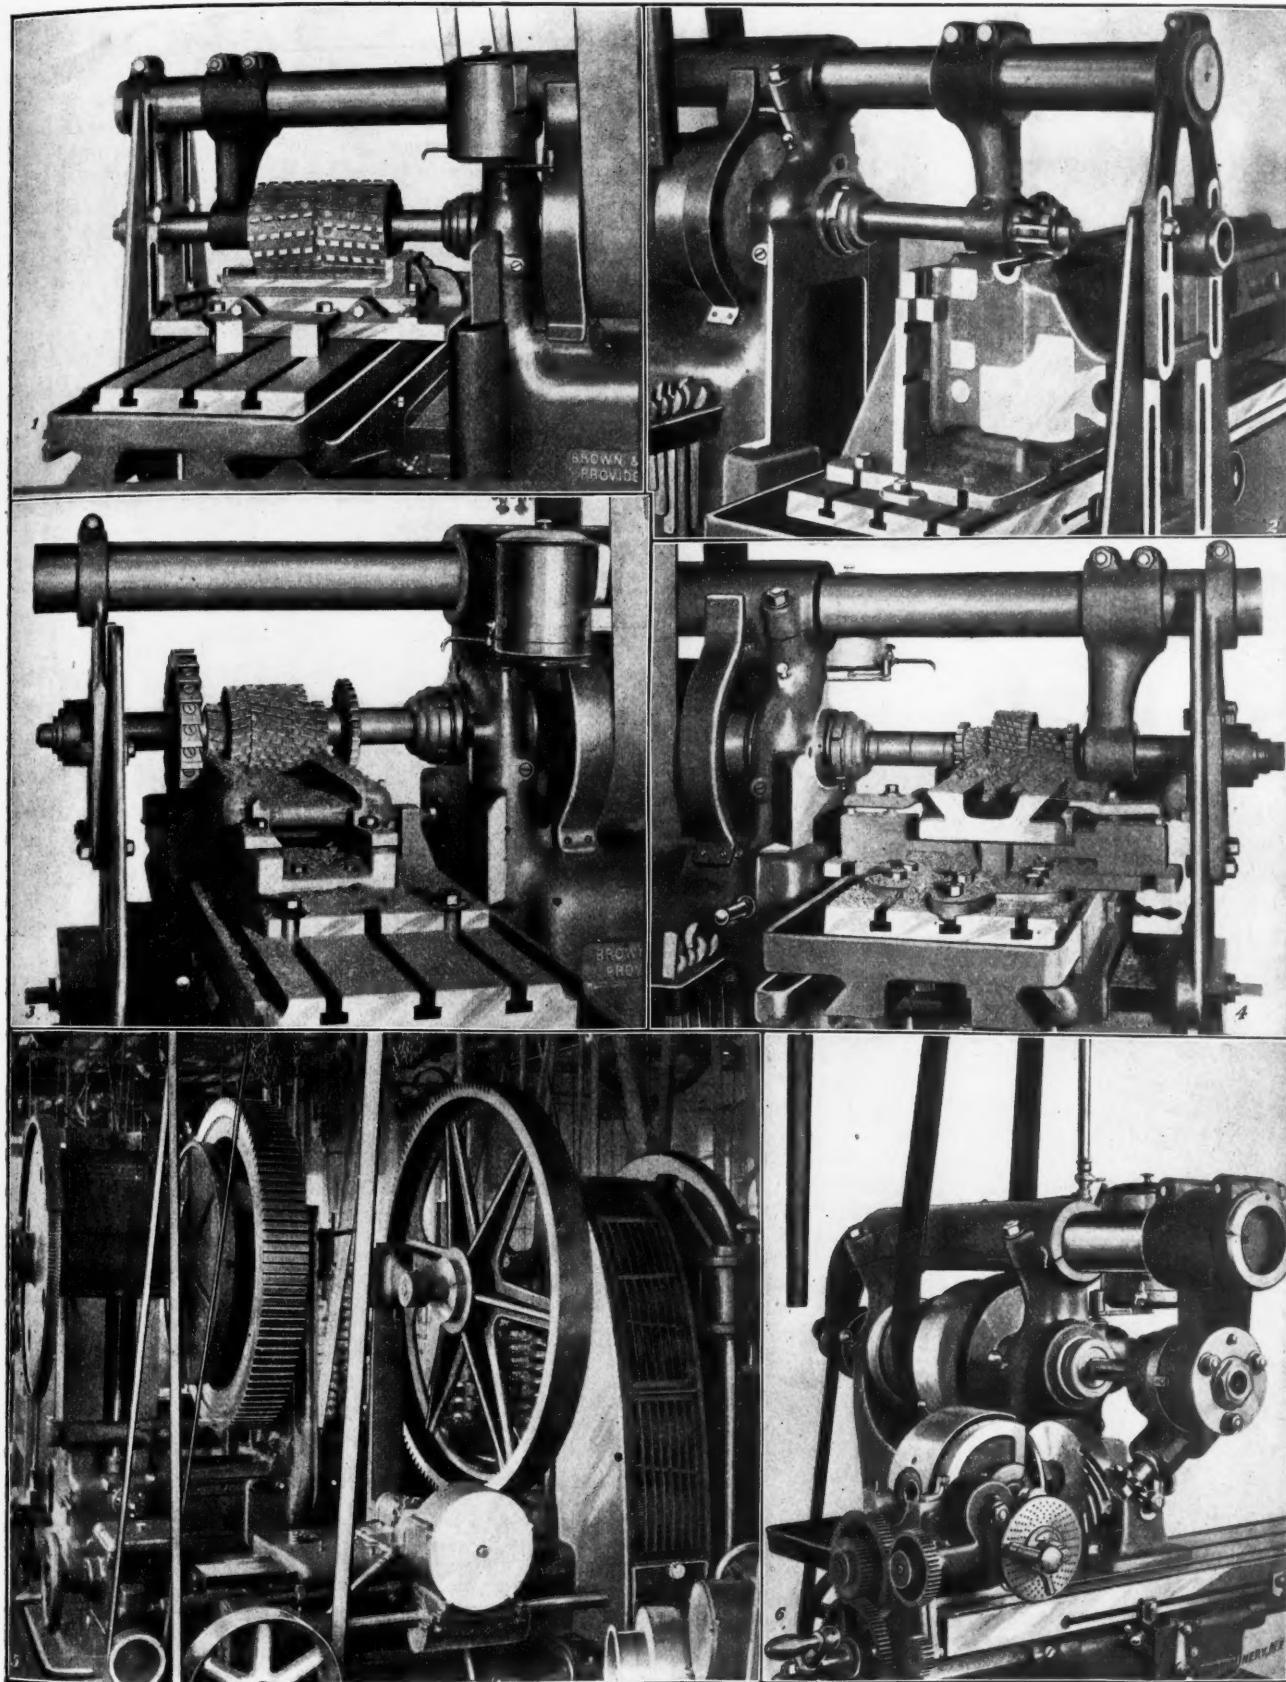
Milling Vise Beds with Inserted Tooth Cutters.
